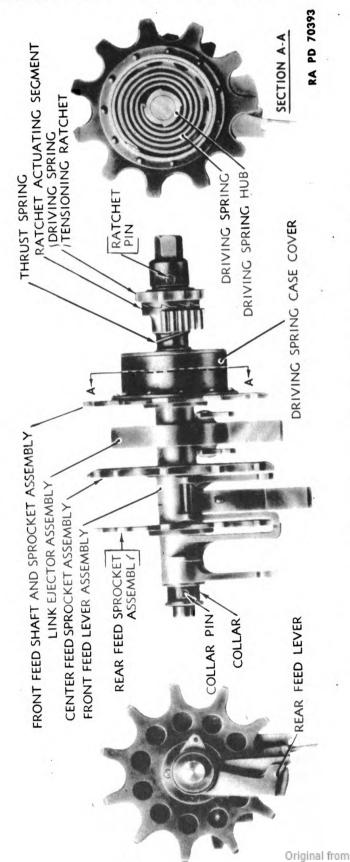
20-MM Feed Mechanism AN-M1 with Cover Removed
